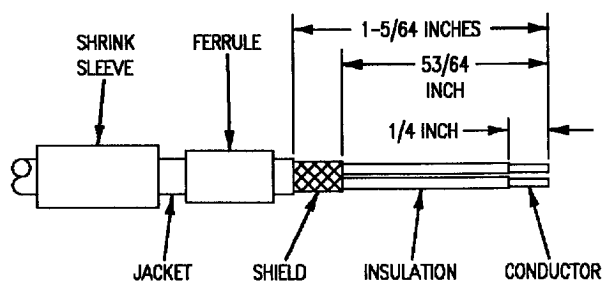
31-33449-XX and 5801-XXXX Twinax Connector Repair (Sheet 3)
